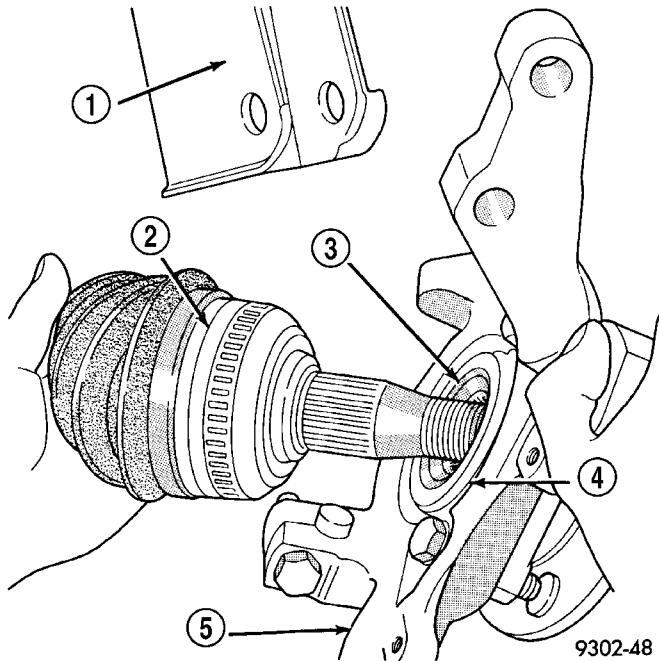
Outer C/V Joint Installation Into Hub and Bearing
